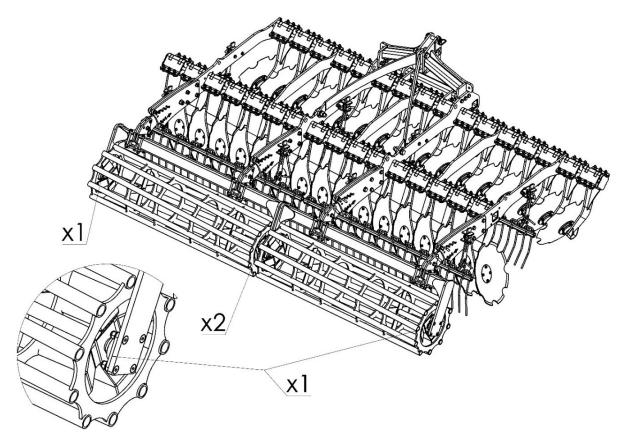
Roller bearing assembly – 4 lubrication points (version 4m), 2 lubrication points (versions 3.5m, 3m)
